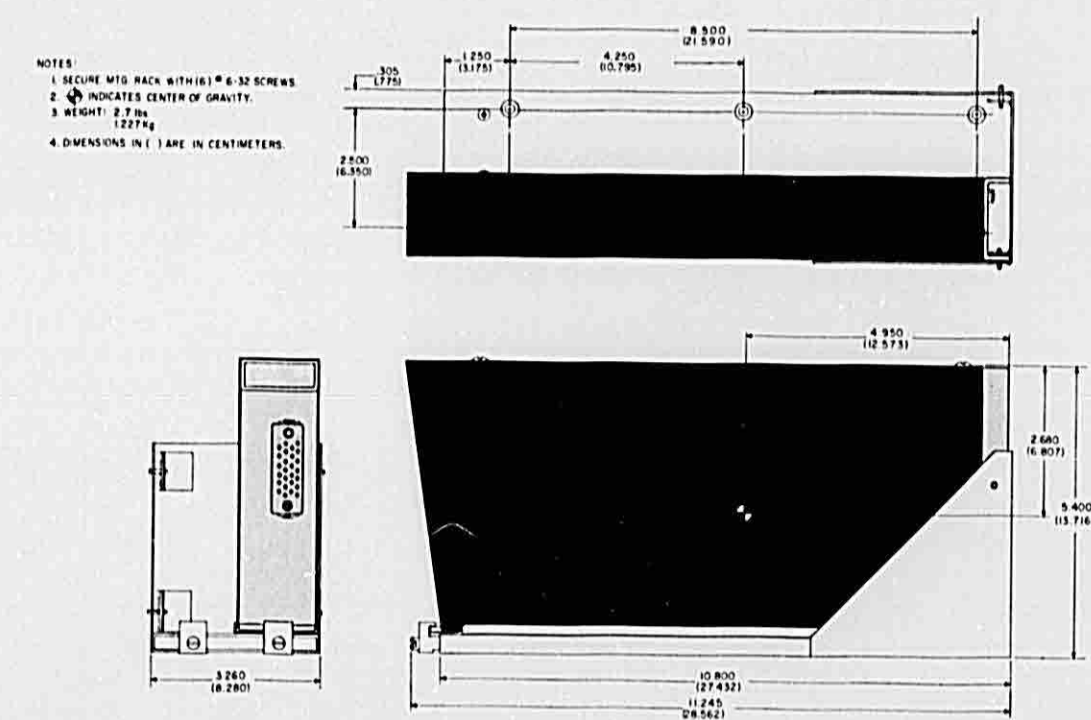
KN 77 OUTLINE AND MOUNTING DRAWING
